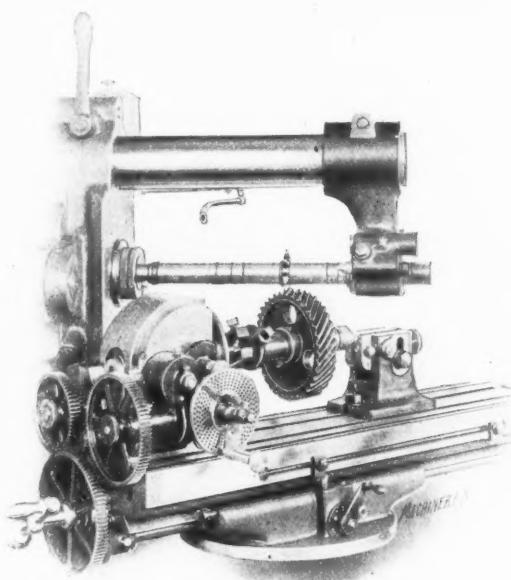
Cutting Spiral Gears of Helix Angle too Great to Allow the Method of Fig. 81; employing the Brown & Sharpe Vertical Milling Attachment.
